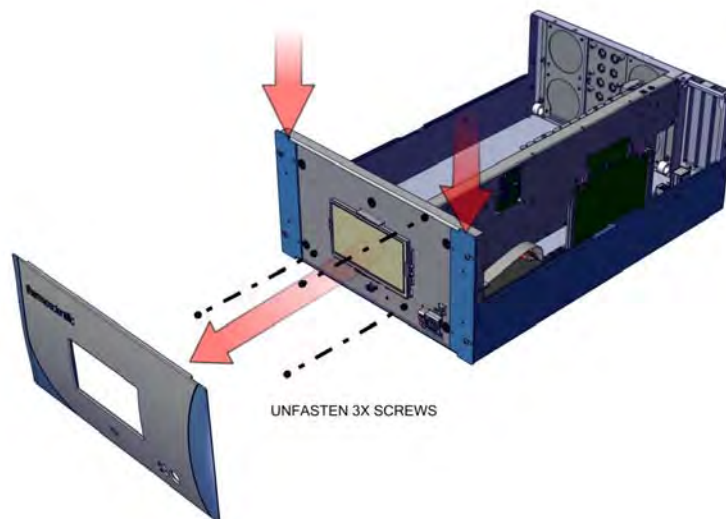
Unfasten Hardware Front for Measurement Side Removal
